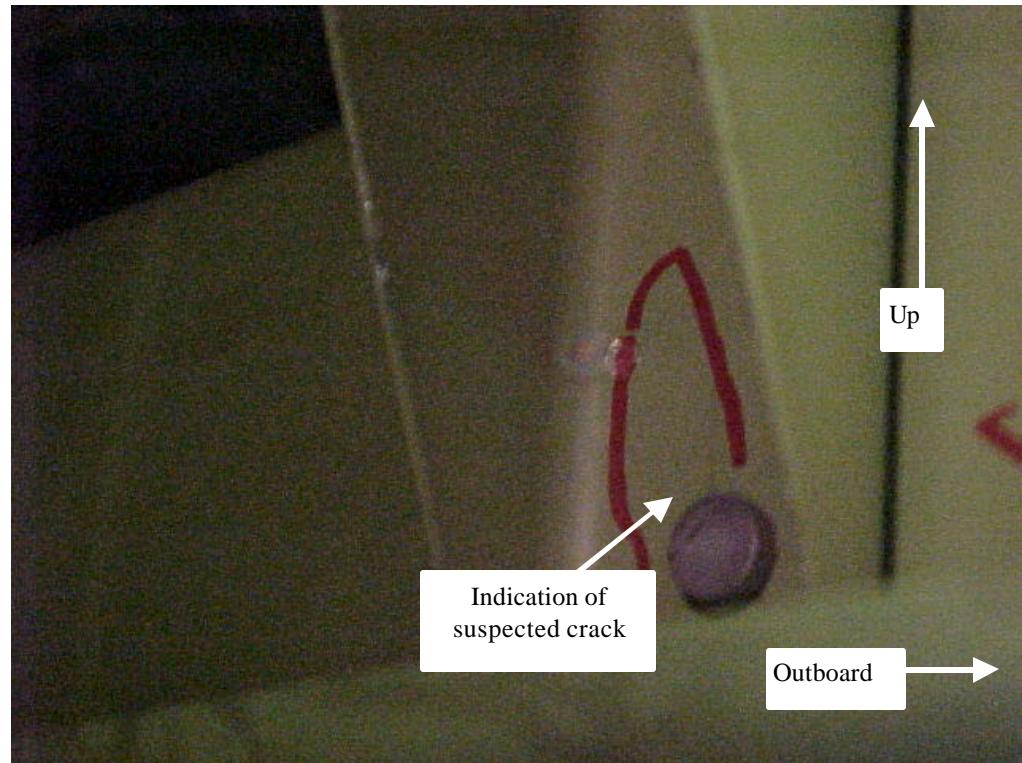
Photograph of stringer clip at FS 680, stringer 2R. Detailed visual inspection discovered an indication.
